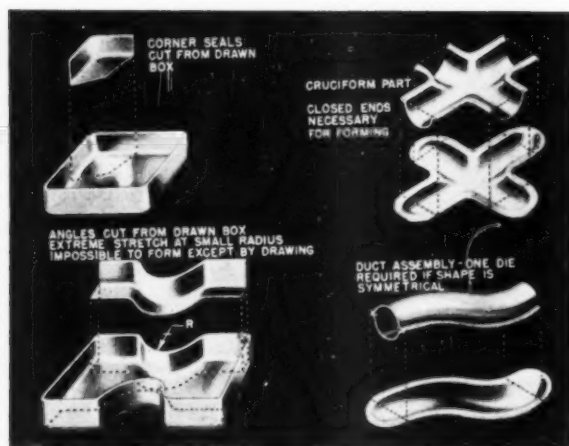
Examples of oddly shaped parts which may be cut from drawn shapes
